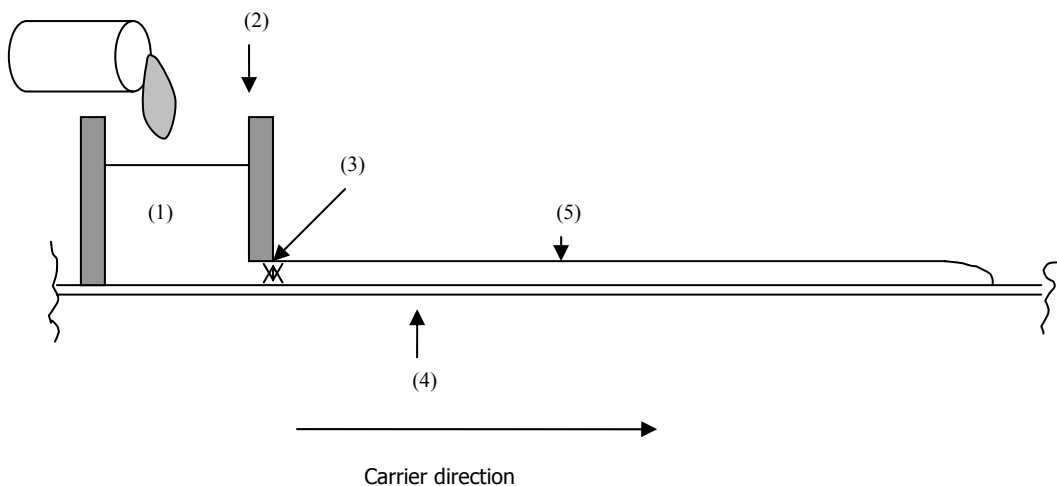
Sketch of the mechanism at the basis of the tape casting equipment
